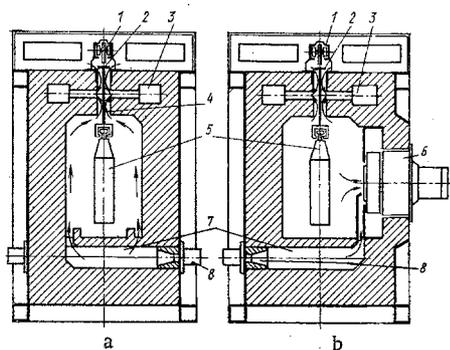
Cross section of high-temperature (a) and low-temperature (b) overhead conveyor furnaces. 1) Overhead conveyor; 2) covered slots; 3) flue; 4) hanger; 5) forging; 6) device for recirculating combustion products; 7) combustion chamber; 8) burner.
